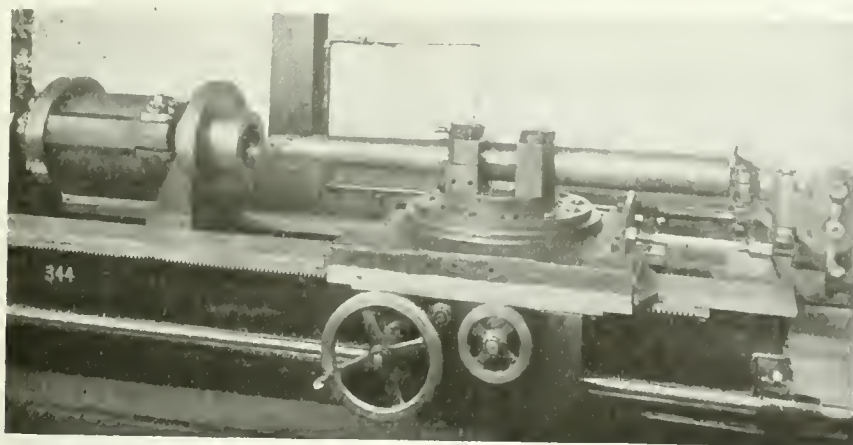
ROUGH BORING ON "PETRIE" LATHE WITH ATTACHMENT AS DETAILED IN FIG. 6.
